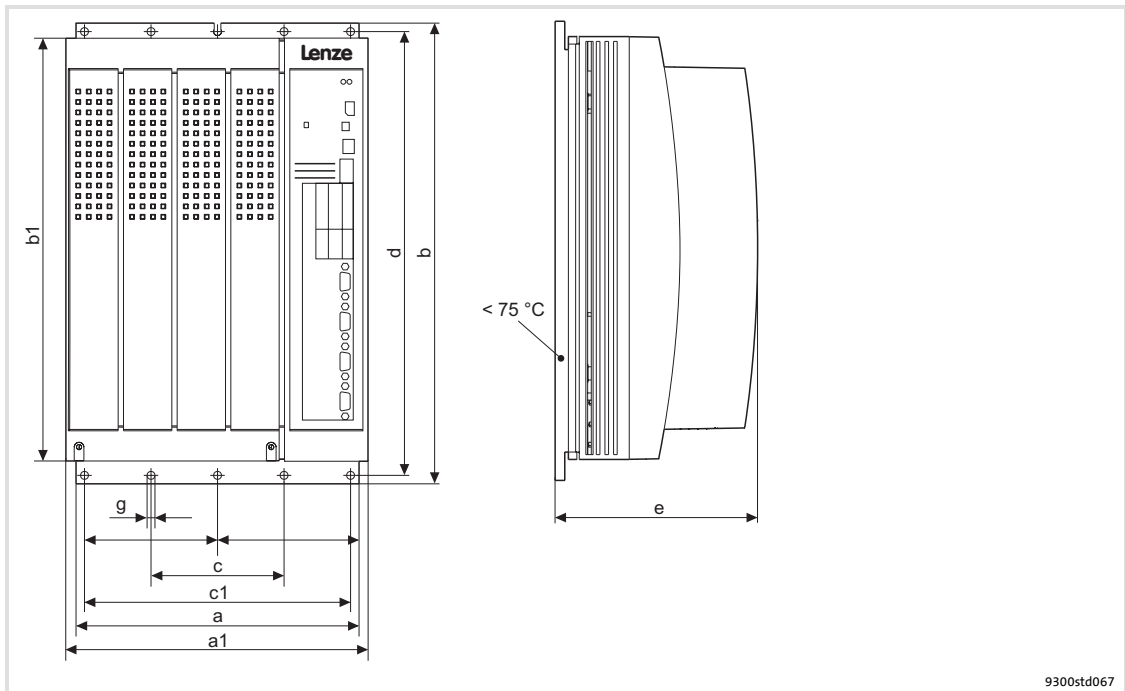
Dimensions for mounting in "cold plate" technique 15 ... 22 kW
